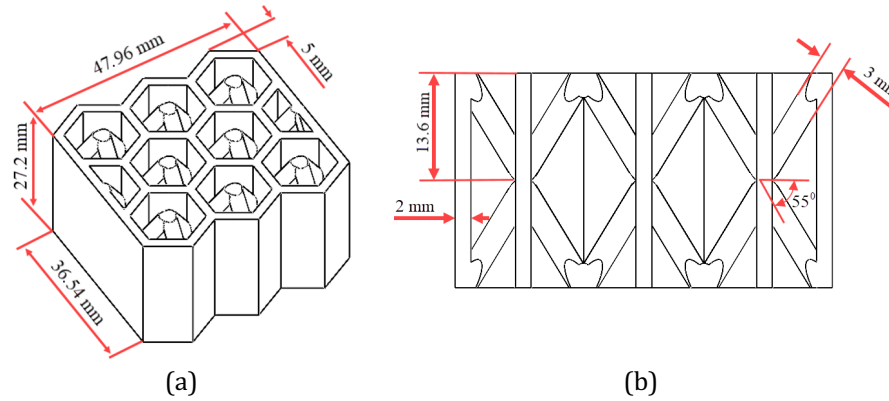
Dimensions of the sandwich panel core: a) isometric view, b) full section view
